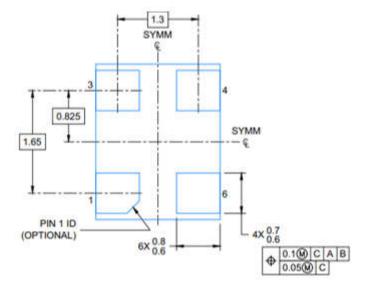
LMK6C Oscillator in 4-Pin, 2.5-mm × 2.0-mm DLF Package
